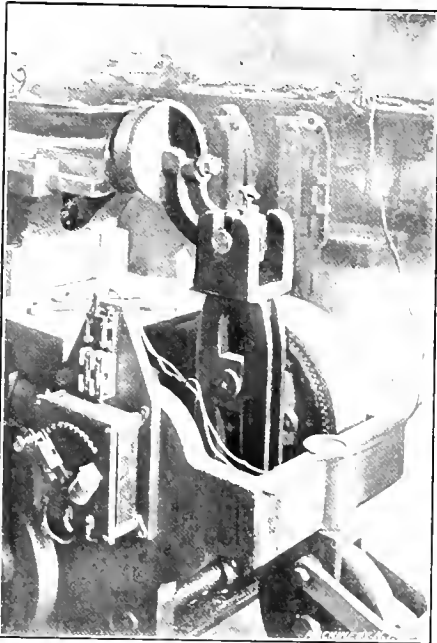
Enlarged View of the Scraping Machine, showing Starting Box, Slotted Cross-head, etc.
